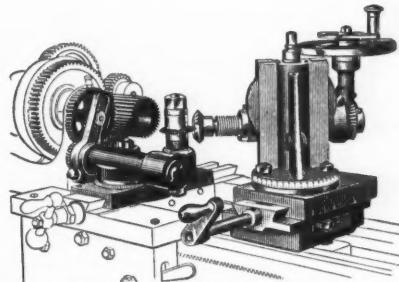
Milling Attachment in Position for Cutting Bevel Gears.
